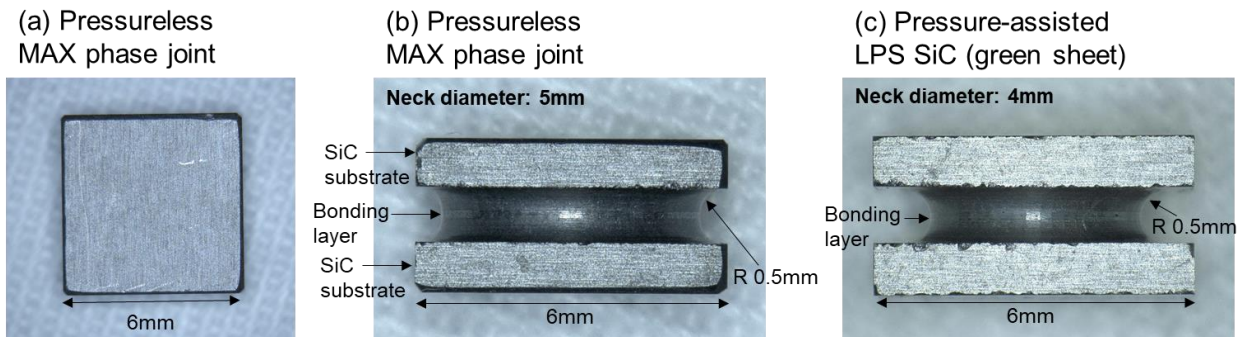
Geometry of the hourglass SiC joint specimens: (a) top view and (b) side view of pressureless MAX-phase joint and (c) side view of pressure-assisted LPS-SiC (green sheet) joint.
